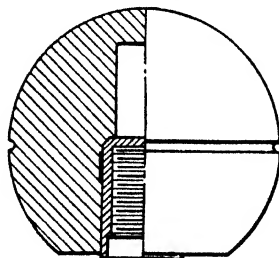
Ball knob in which flash is removed by simply turning a groove where the flash comes.
